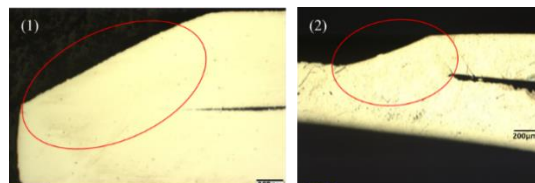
Samples of polished specimens: (1) edge of the orbital weld, (2) longitudinal weld.
